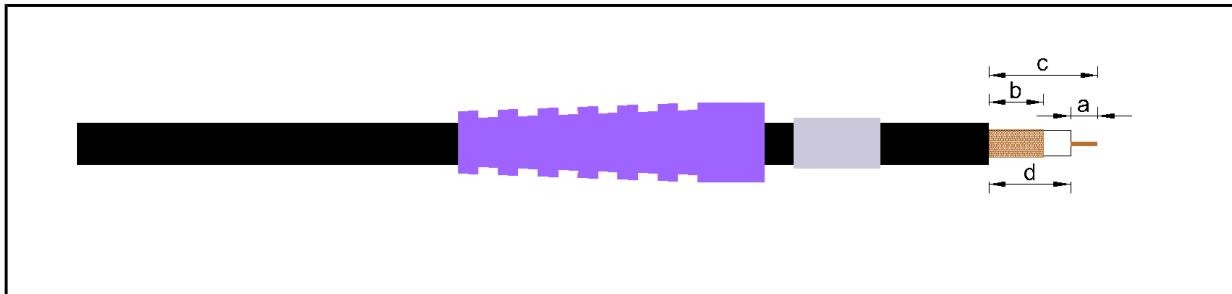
Strain Relief Boot and Crimp Sleeve on Coaxial Cable
